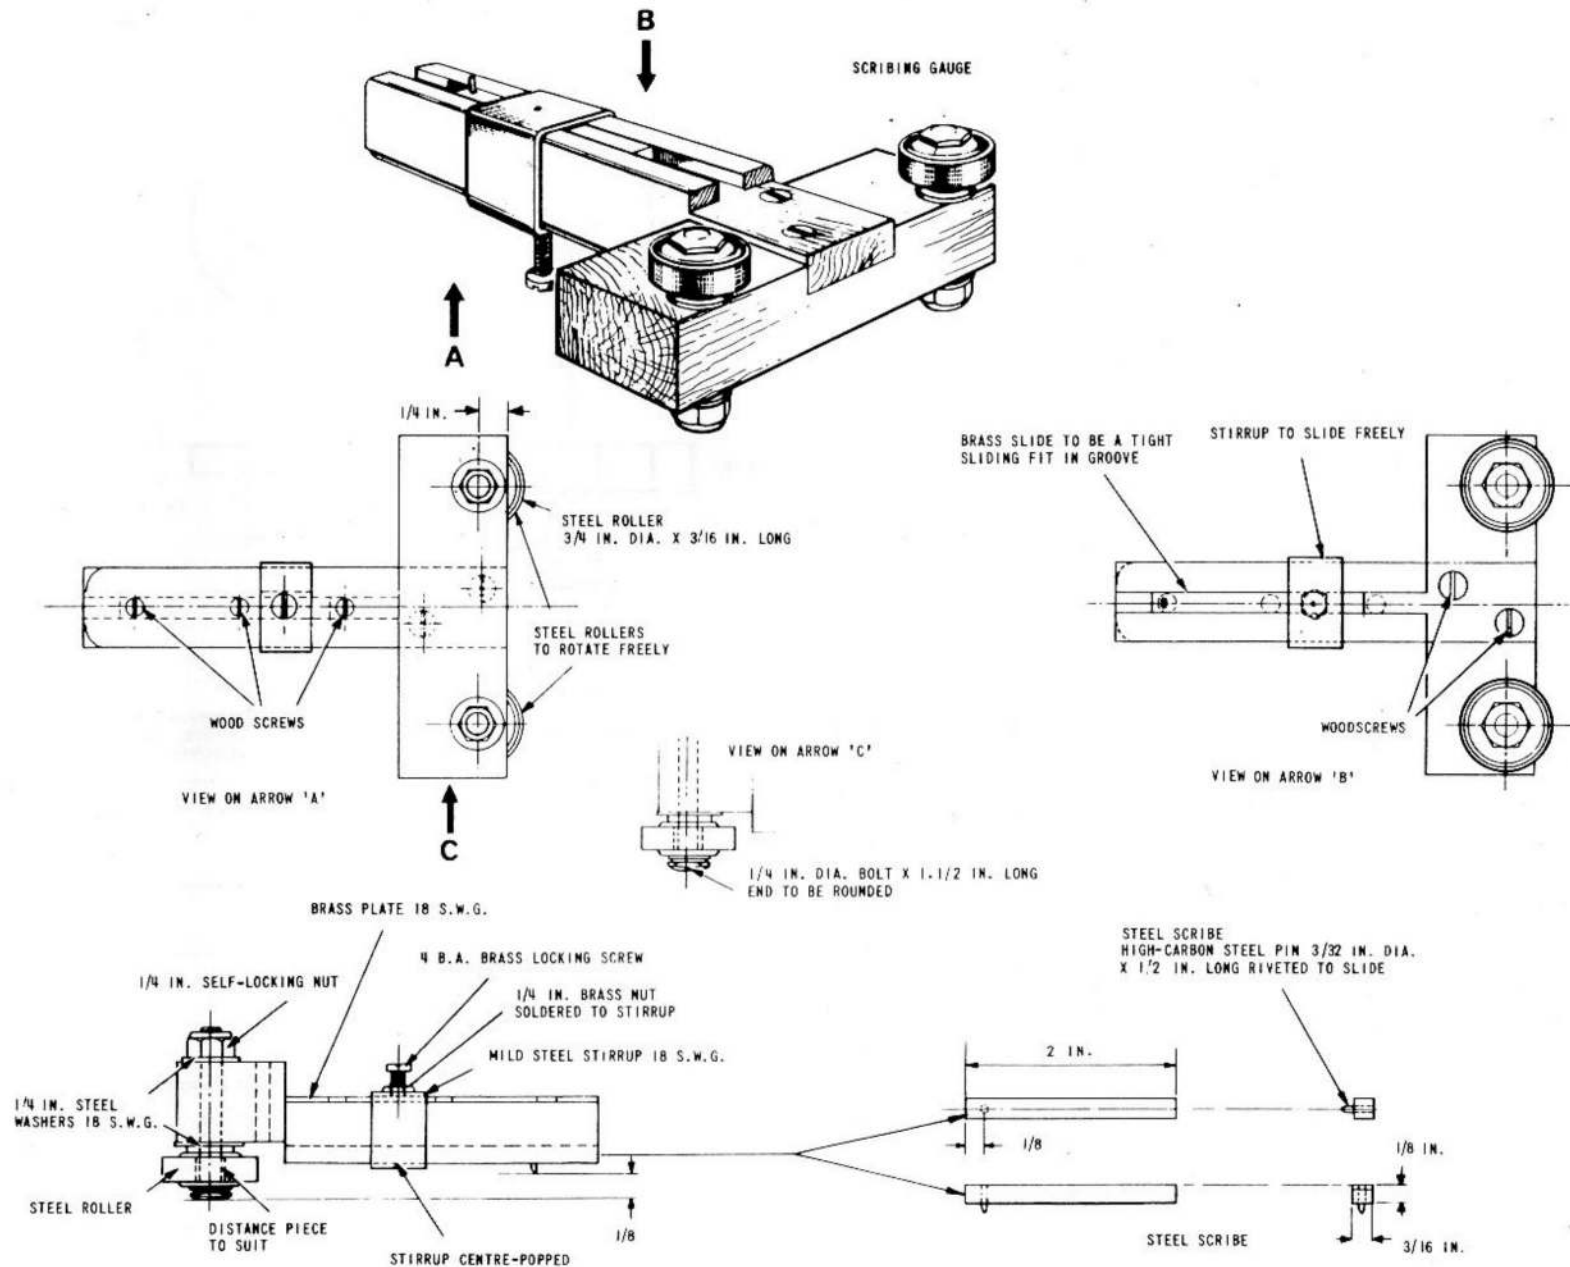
FIG. IC. MAIN-PLANE SKIN SCRIBE GAUGE
